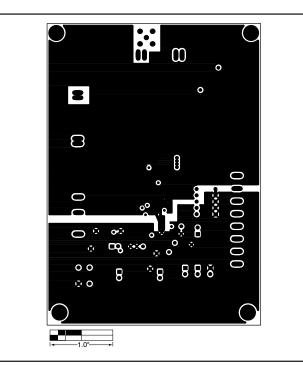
MAX1711 Voltage Positioning EV Kit PC Board Layout—Internal GND Plane (Layer 3)
